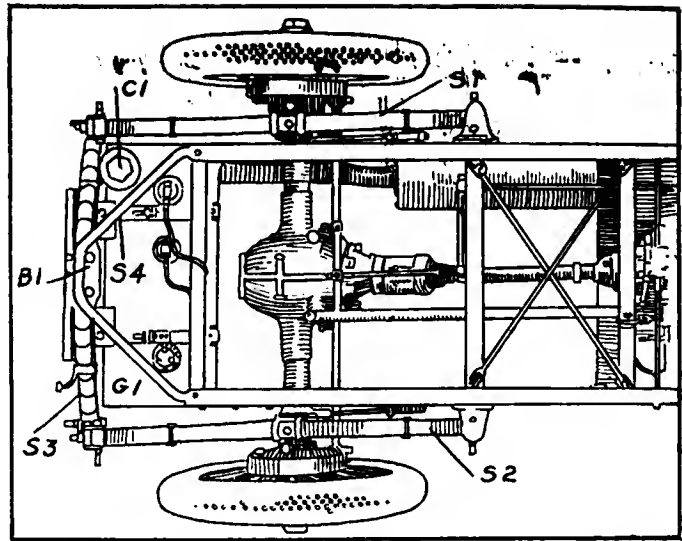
Sketch of rear of chassis, showing the long half-elliptic side members and cross member of the platform spring system, live rear axle, rear bracing, and gasoline tank.
